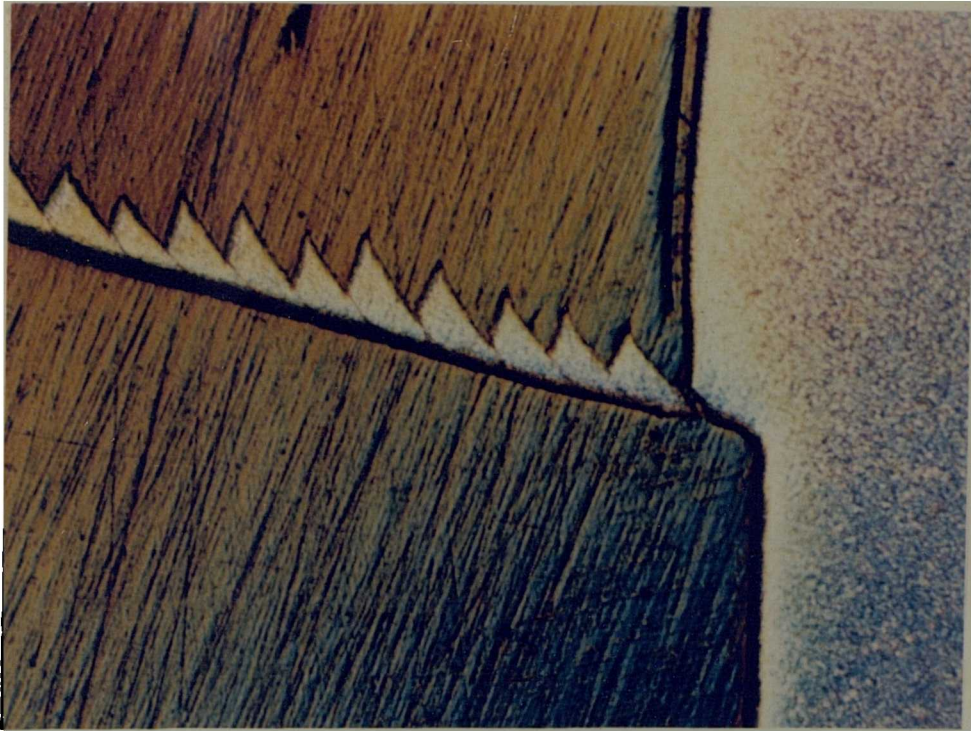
Enlarged view of (a) showing CBN tool particles attached to the newly surface formed (400X).
